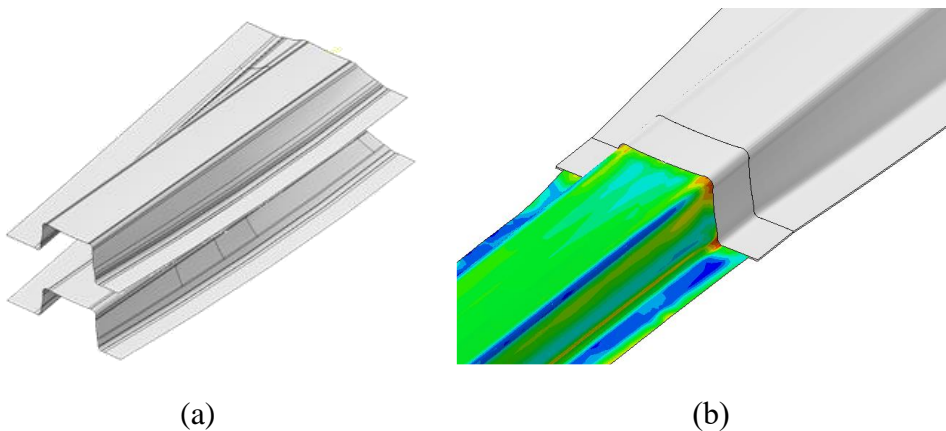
(a) The configurationshape of the toolss modeled with a rigid body element and (b) the forming of the sheet workpiece using in the FE simulation of model of the newly developed press-forming process
